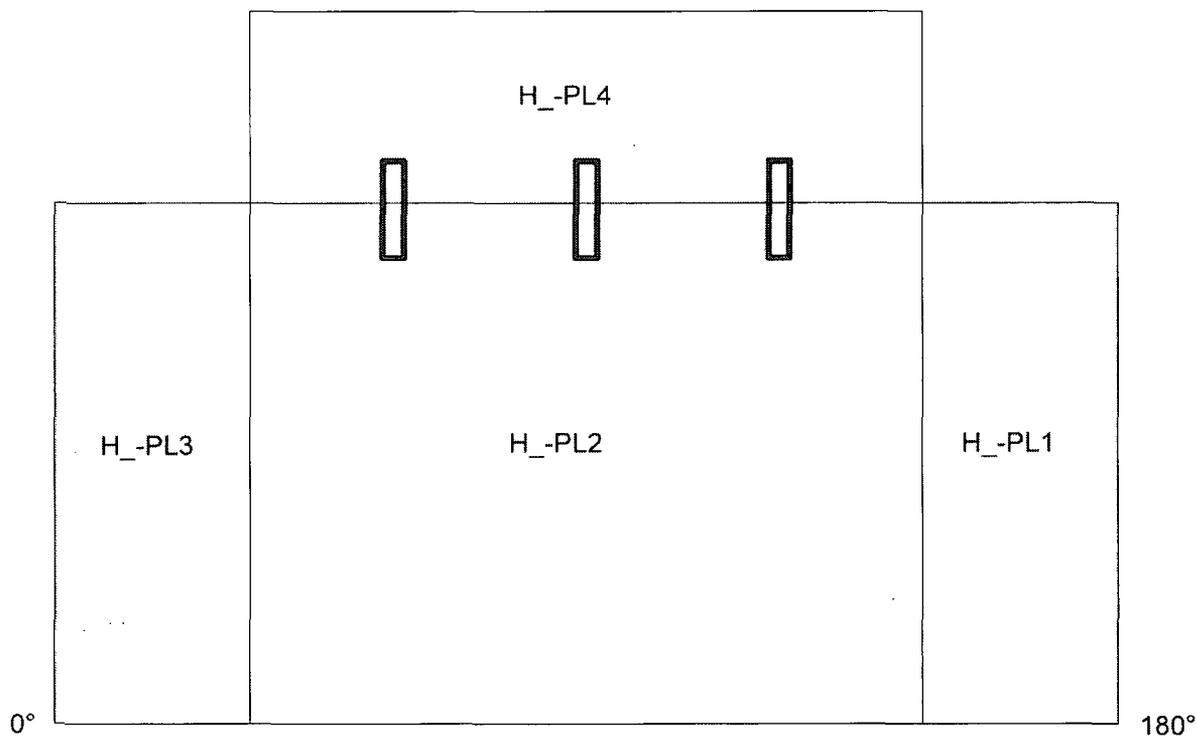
Weld layout for interior of outer banks (Square Hood Dryer)
